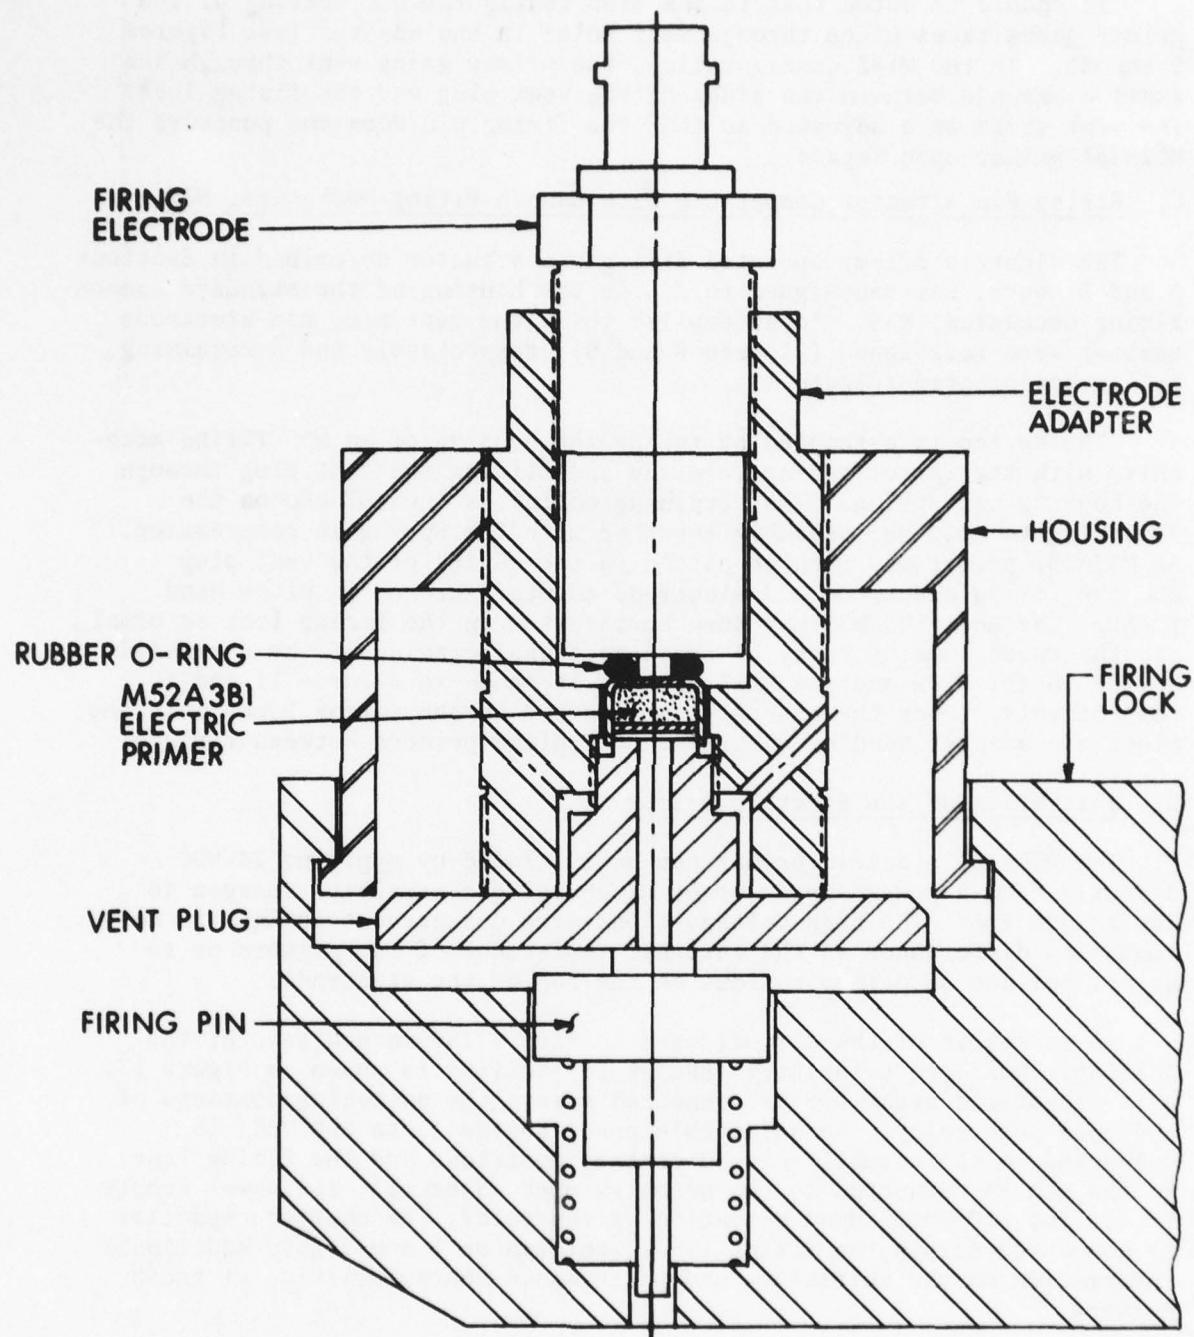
Cross-Section of Assembled Firing Pin Actuator
